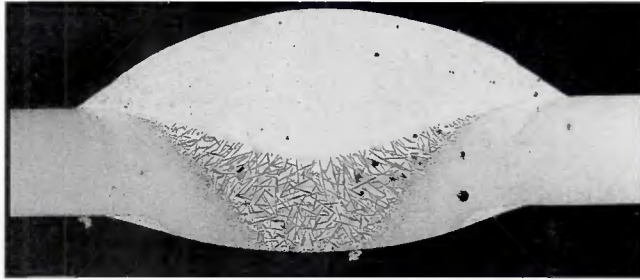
Weld made with preweld heat treatment at 750°F for 100 h in vacuum, AC, ER4043 (no etchant, 11X).
